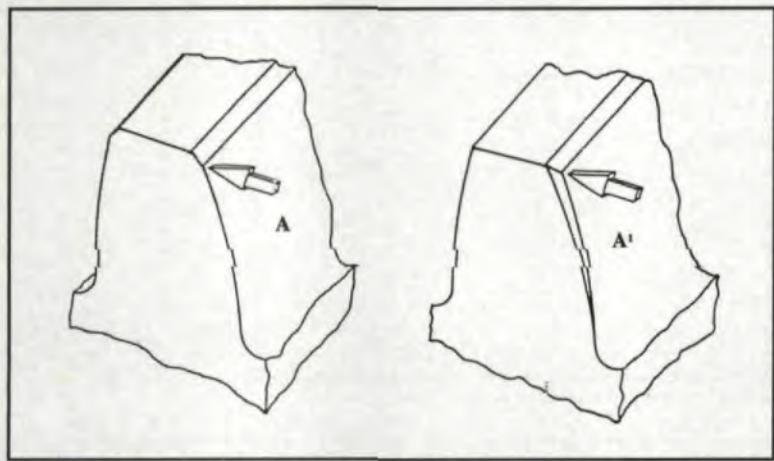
Gear tooth with tip chamfer and tip chamfer along lead and edge chamfer.
